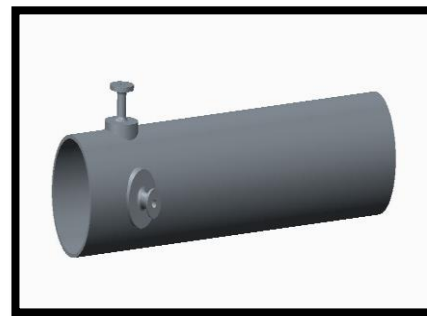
3D Model with nozzle placed at smaller end of cylinder without fillet
